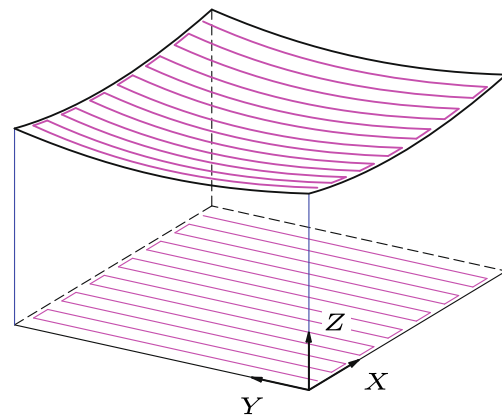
Toolpath footprint used for locating the first point of contact zig-zag toolpath
